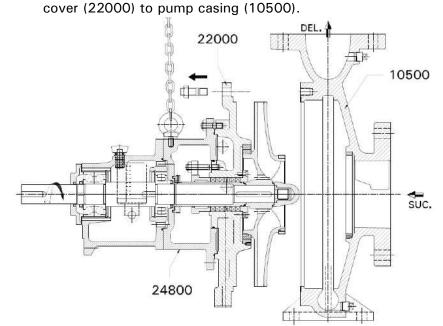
Removal of back pull out assembly - casing cover is sandwiched
